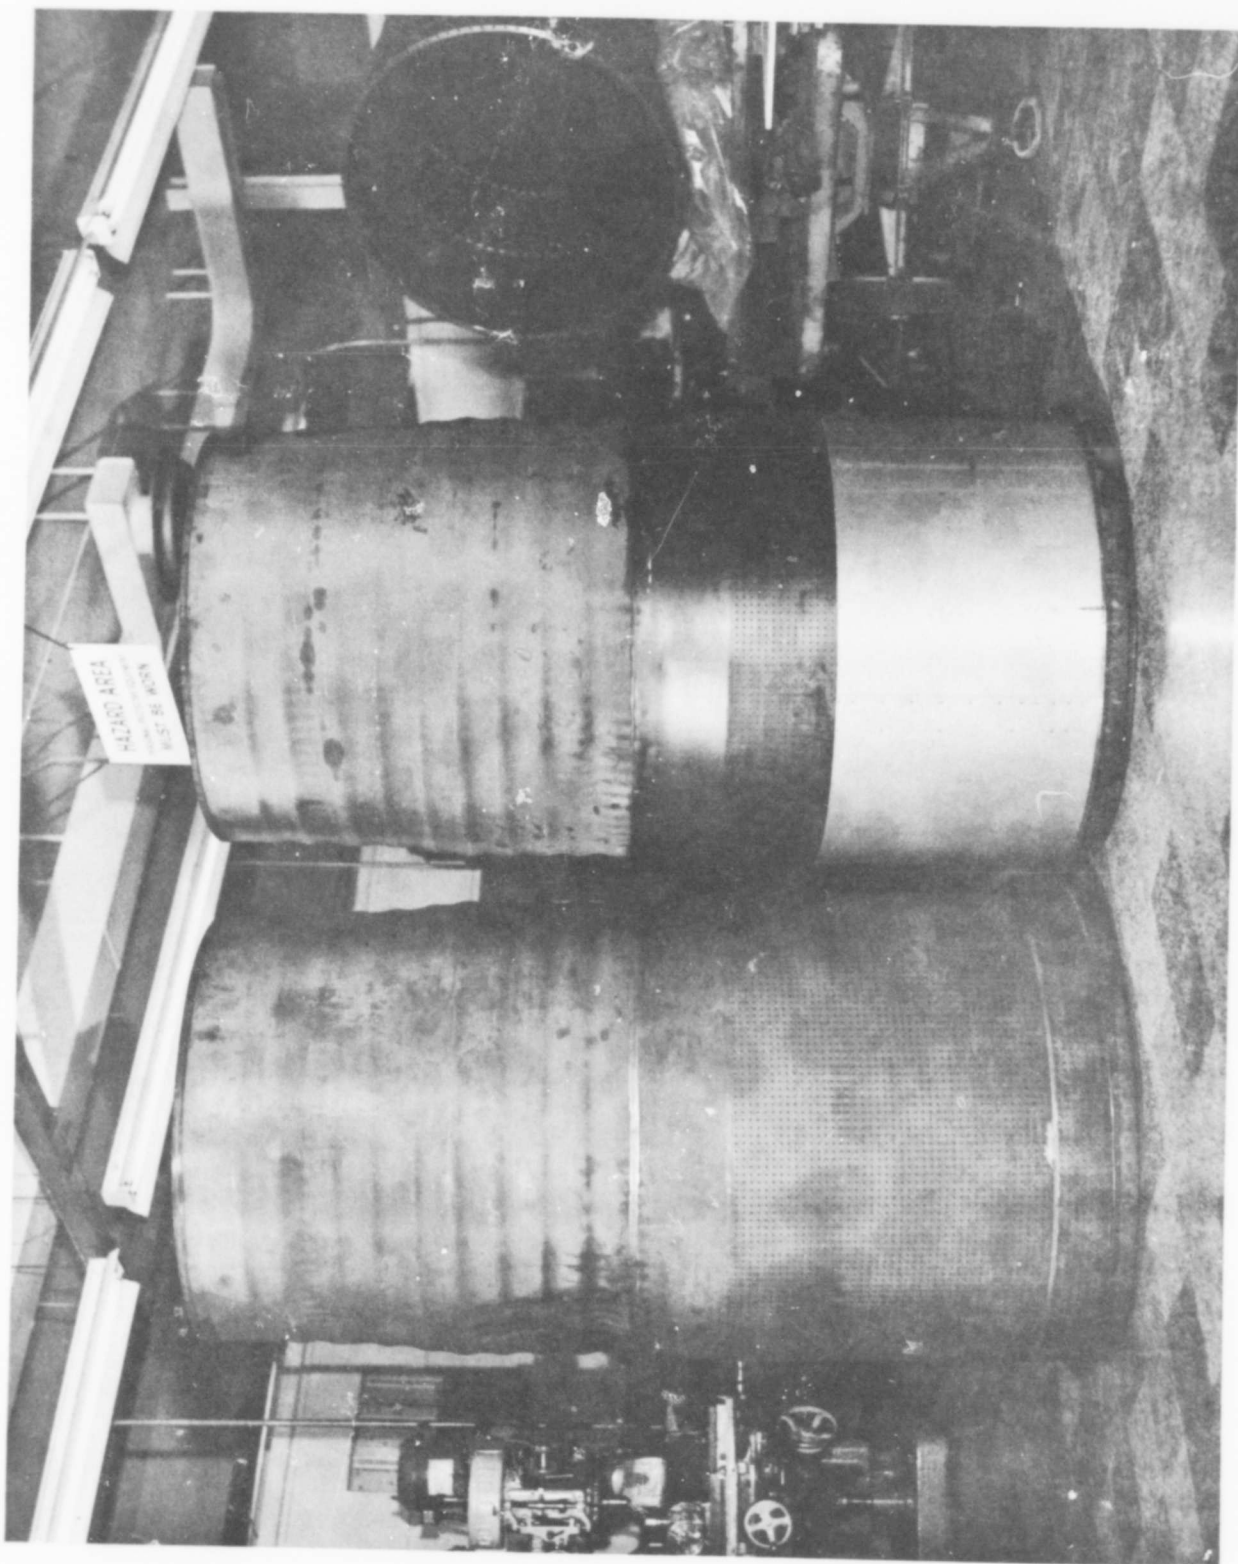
STANDARD AND MODIFIED SCRECH LINERS
